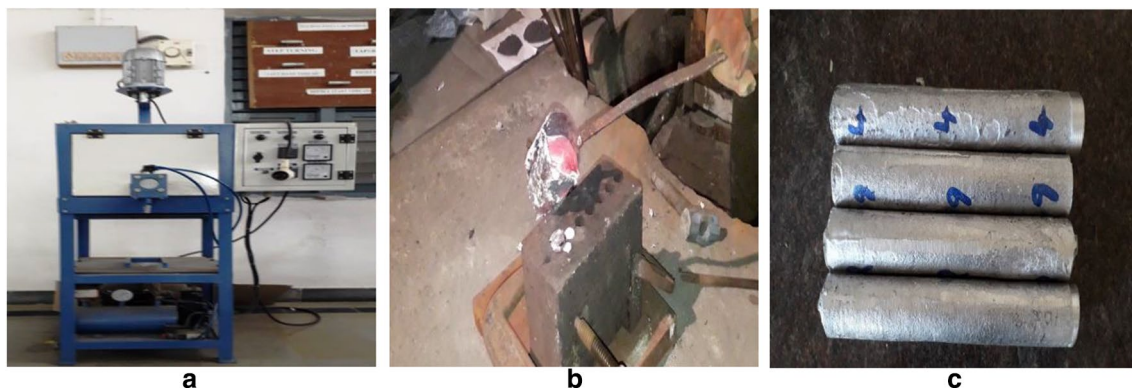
Fabrication steps of MMC's: a stir casting, b pouring into mold, c fabricated samples
